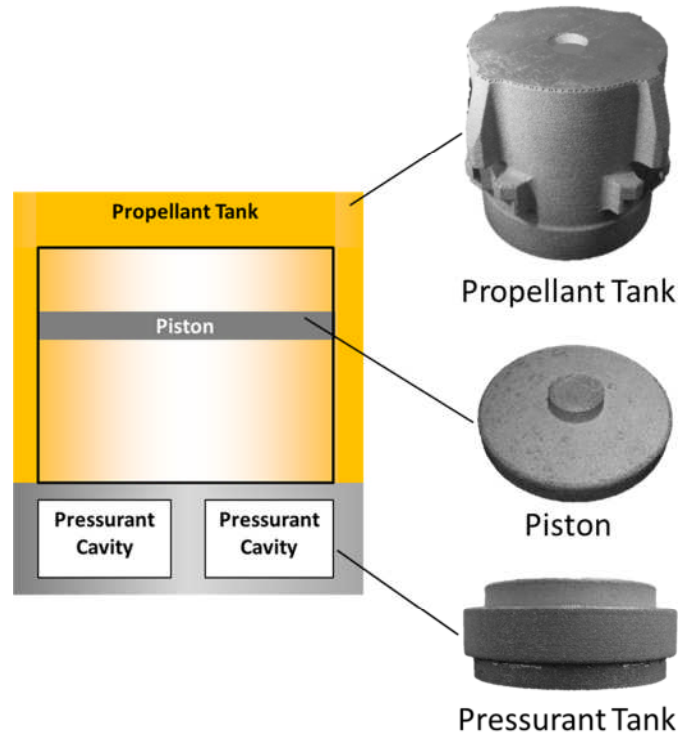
As-Printed EBM Additive Manufactured Piston Tank Components
